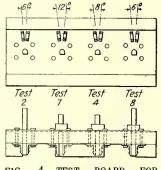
TEST BOARD FOR C H E C K I N G CONTROLLER HANDLE ADJUSTMENTS IN SERVICE
